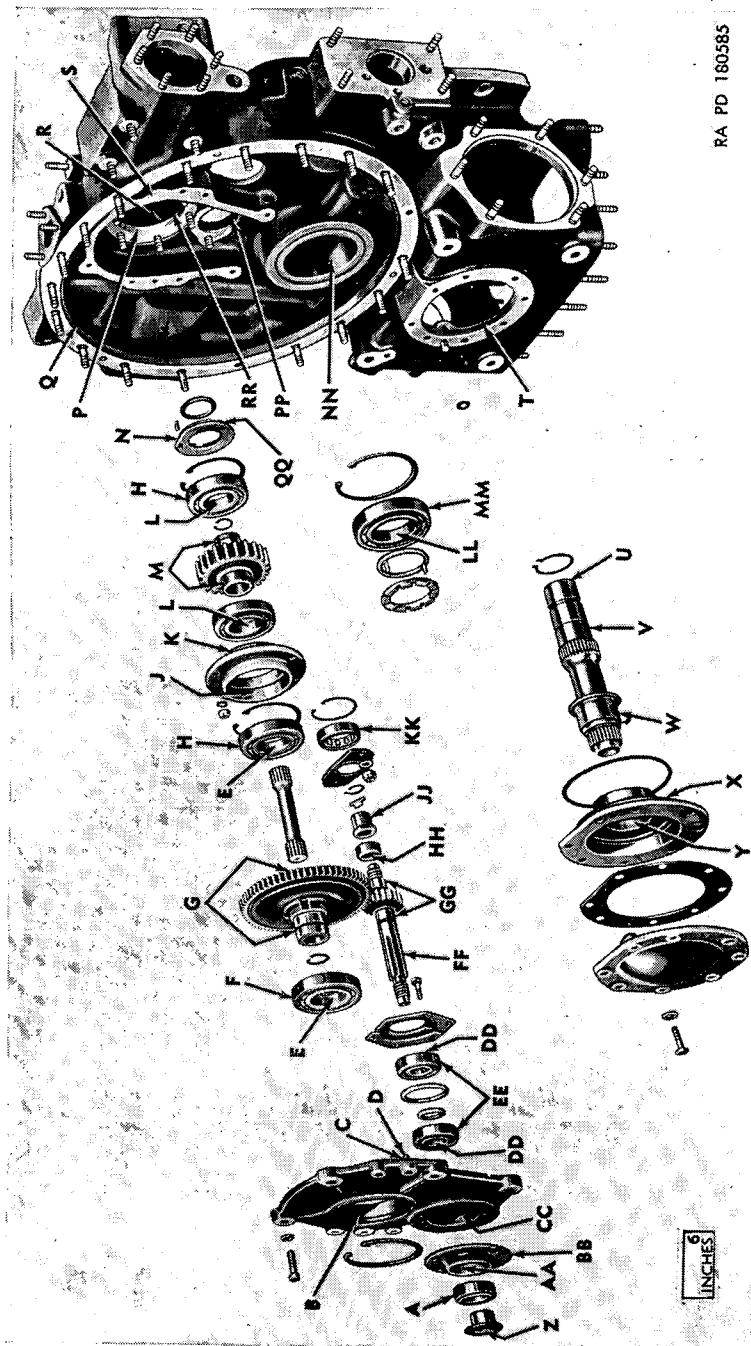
Repair and rebuild standard points of measurement for accessory case drive gearing (front) and diaphragm and impeller shaft assembly.
